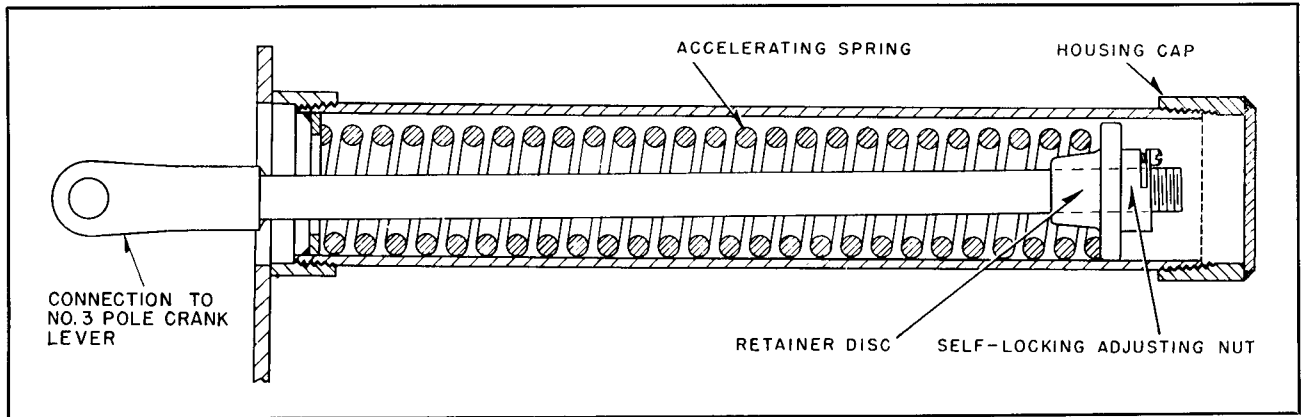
Accelerating Spring Used with Pneumatic Mechanism
